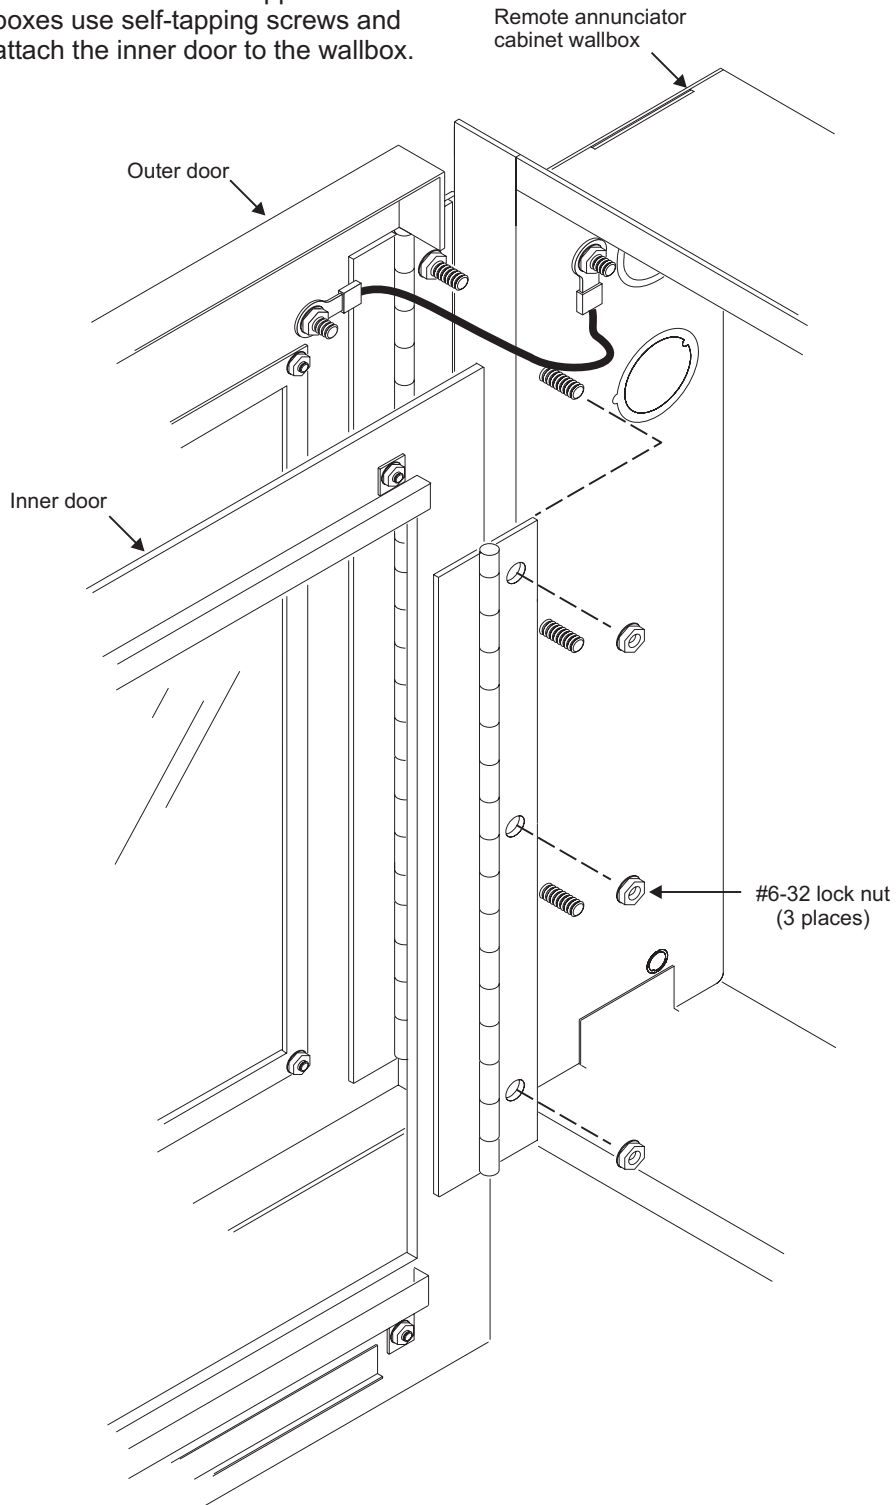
Typical inner door installation (semi-flush mount wallbox shown)
